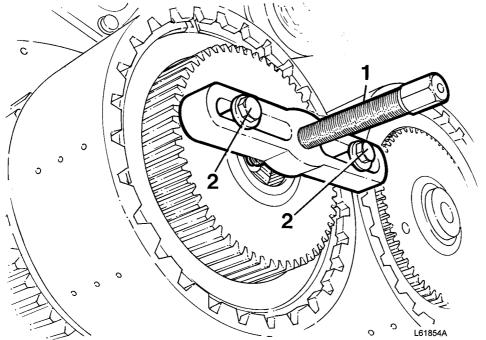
Removing/fitting drive gear Detach the cable harness from the sensor.
